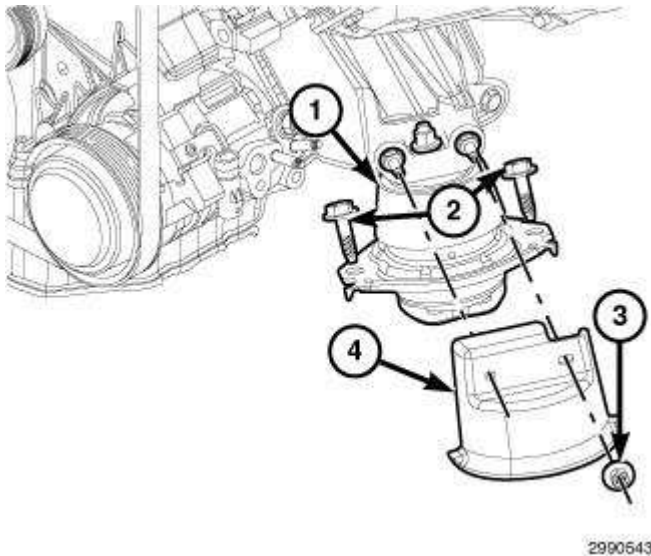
Engine Mount Heat Shield Retaining Nuts, Lower Mount Retaining Bolts & Heat Shields
